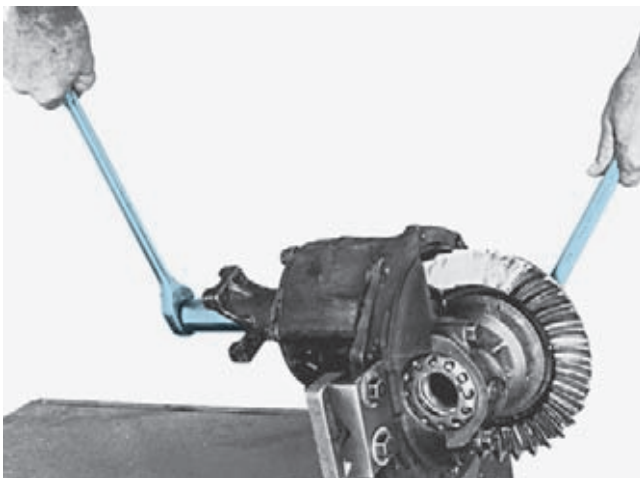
A gear contact pattern is the final check for a gear adjustment. The more pressure you apply between the ring and pinion gears, the sharper the contact pattern will be. Here a box wrench is on one of the ring gear bolts to load it while the pinion gear is being turned with a socket and ratchet handle.
